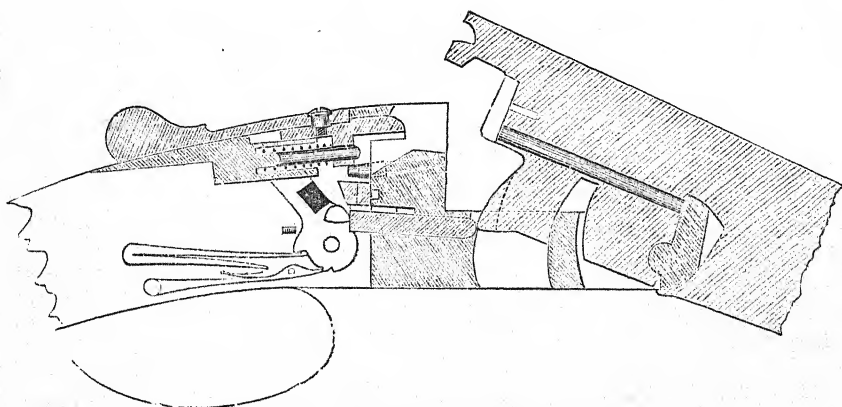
Mechanism of Parson's Hammerless Gun.
